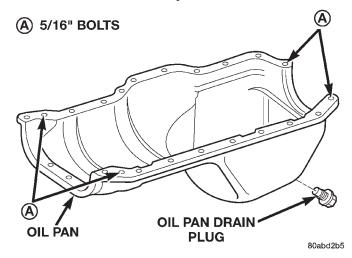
Position of 5/16 inch Oil Pan Bolts
